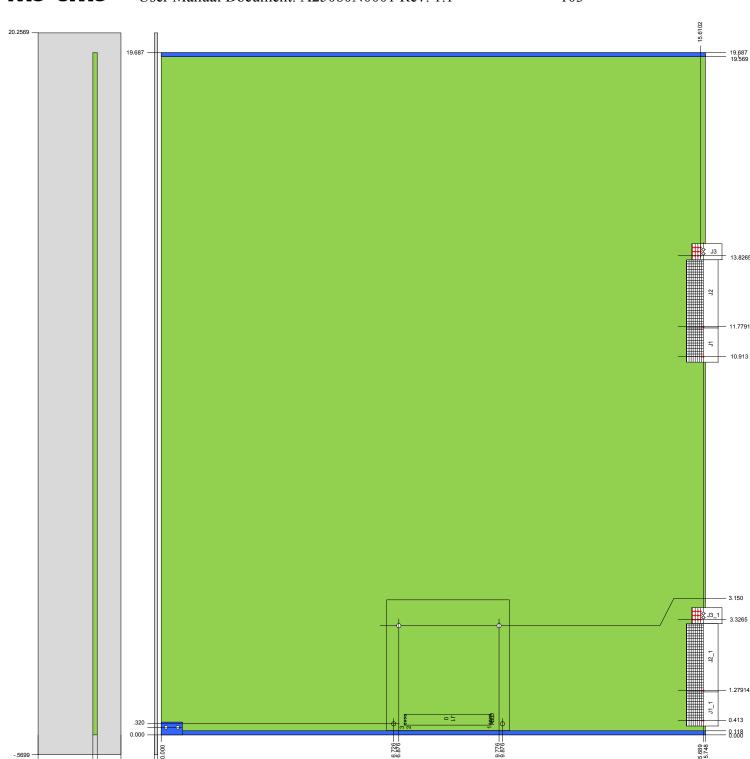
Baseline Board and front panel/location critical dimensions.
